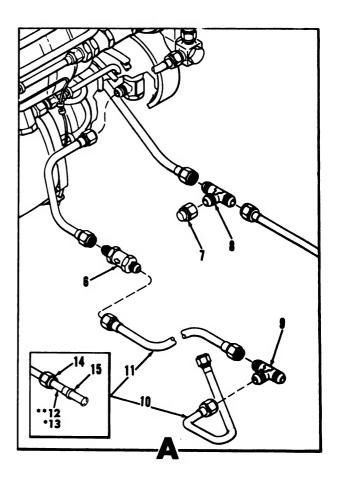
SYSTEM INSTALLATION, HYDRAULIC /9020507/
